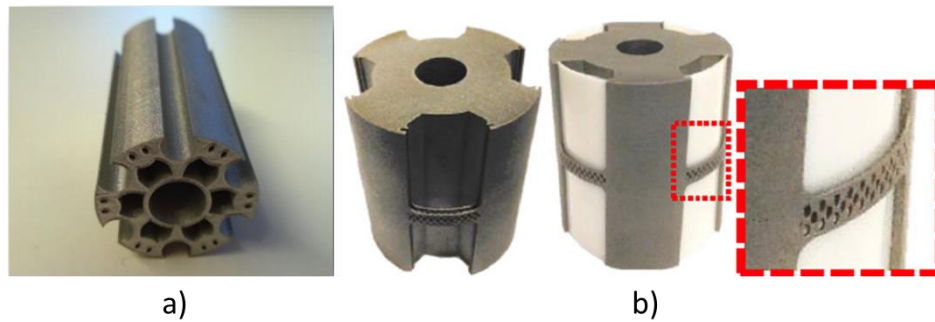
Two rotor prototypes produced through LPBF a) Prototype rotor for low torque ripple of 6/4 SRM manufactured from a custom Fe-Co-V powder blend [119], (b) Asymmetric skew rotor made of maraging steel alloy with rib structure and pole slots for reduction of torque ripple [120]
